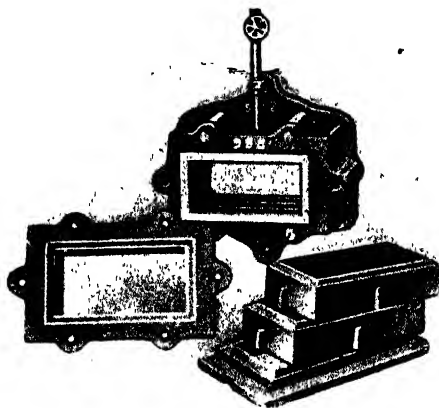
Mouthpiece—Assembled and in Pieces.
